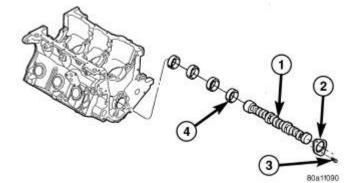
CAMSHAFT AND BEARINGS Courtesy of CHRYSLER LLC
